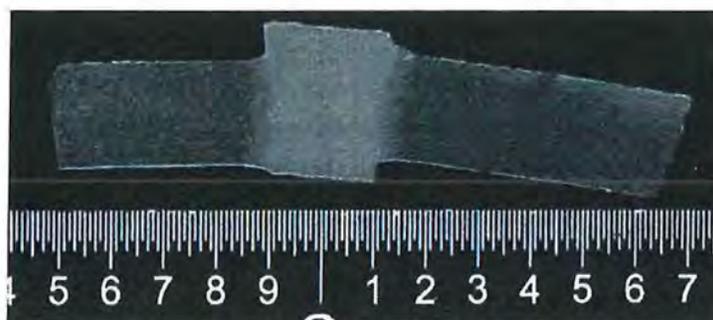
Typical Flash Welded Seam Cross Section, ca. 1946
